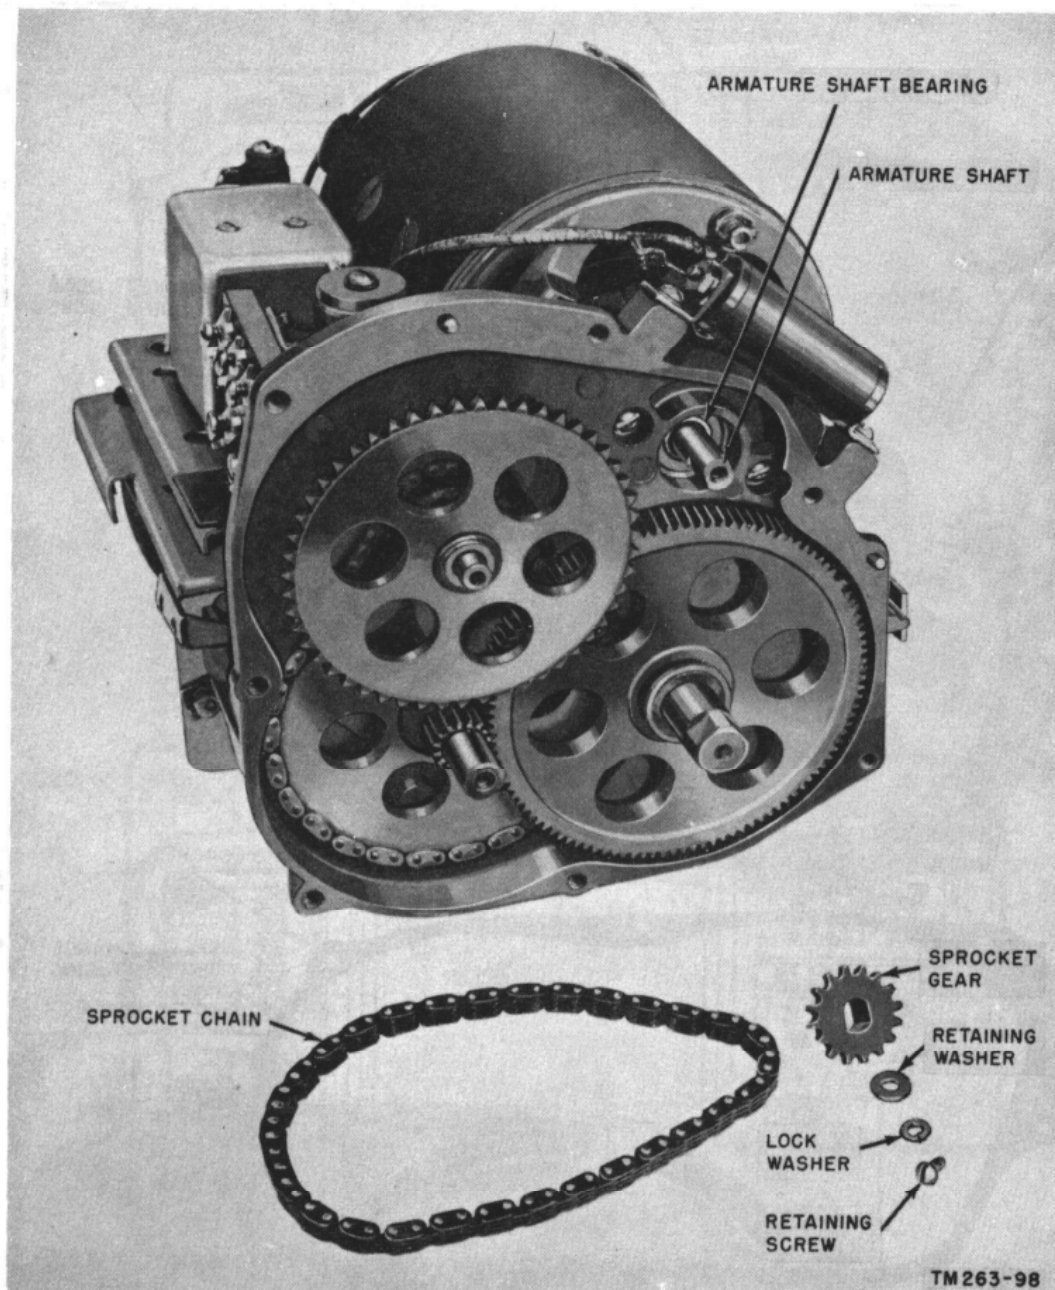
Sprocket gear and chain removed from Generator GN-58-(\*).
